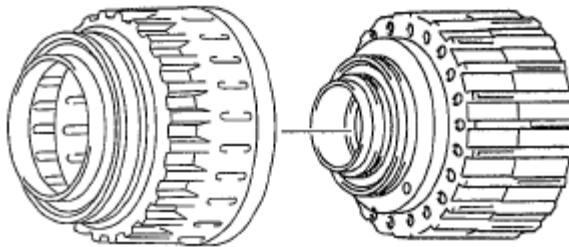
Identifying O-Rings On C3 Clutch Piston Component
